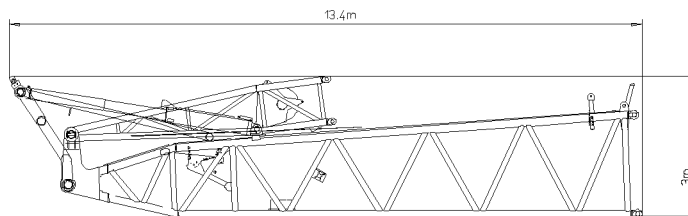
W-pivot section 12 m with WA-frame 1 pivot section
